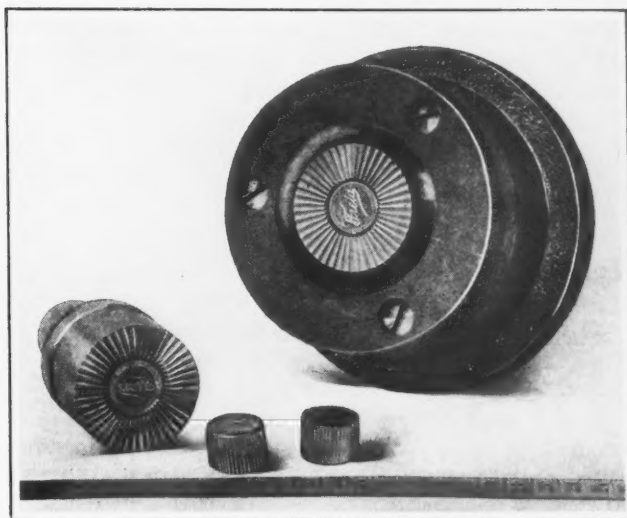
Stamping Die Made by Three-dimensional Engraving Machine Shown in Fig. 2
